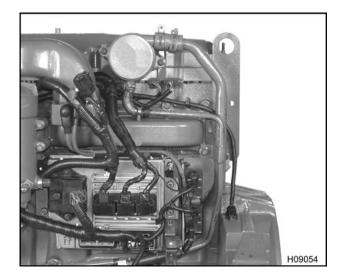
ECM, IDM, EGR drive module, and tube assembly overview
